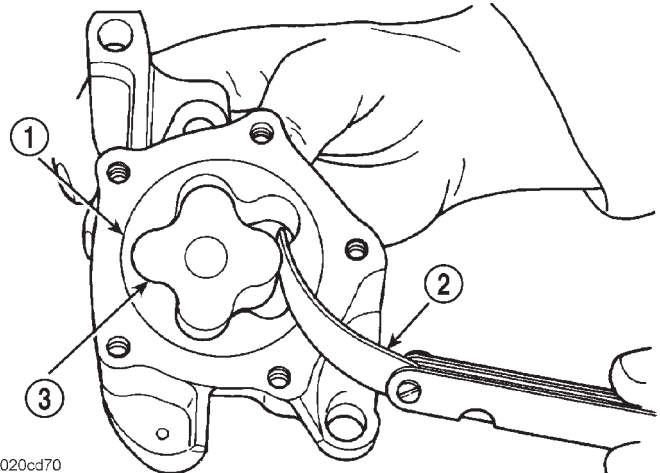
Measuring Outer Rotor Clearance in Housing
